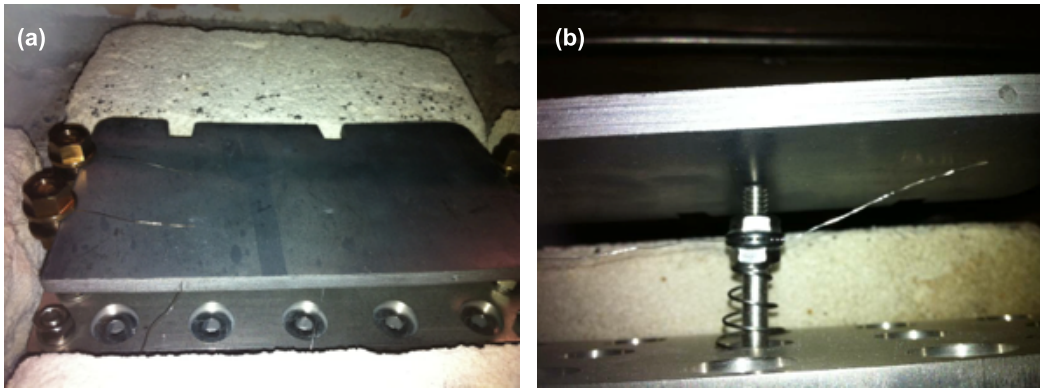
A flat casting showing thermocouple placement: (a) sample placed in a fixture with the fine top and bottom thermocouple wires visible; (b) bottom thermocouple placement with drilled side hole for a thermocouple.
